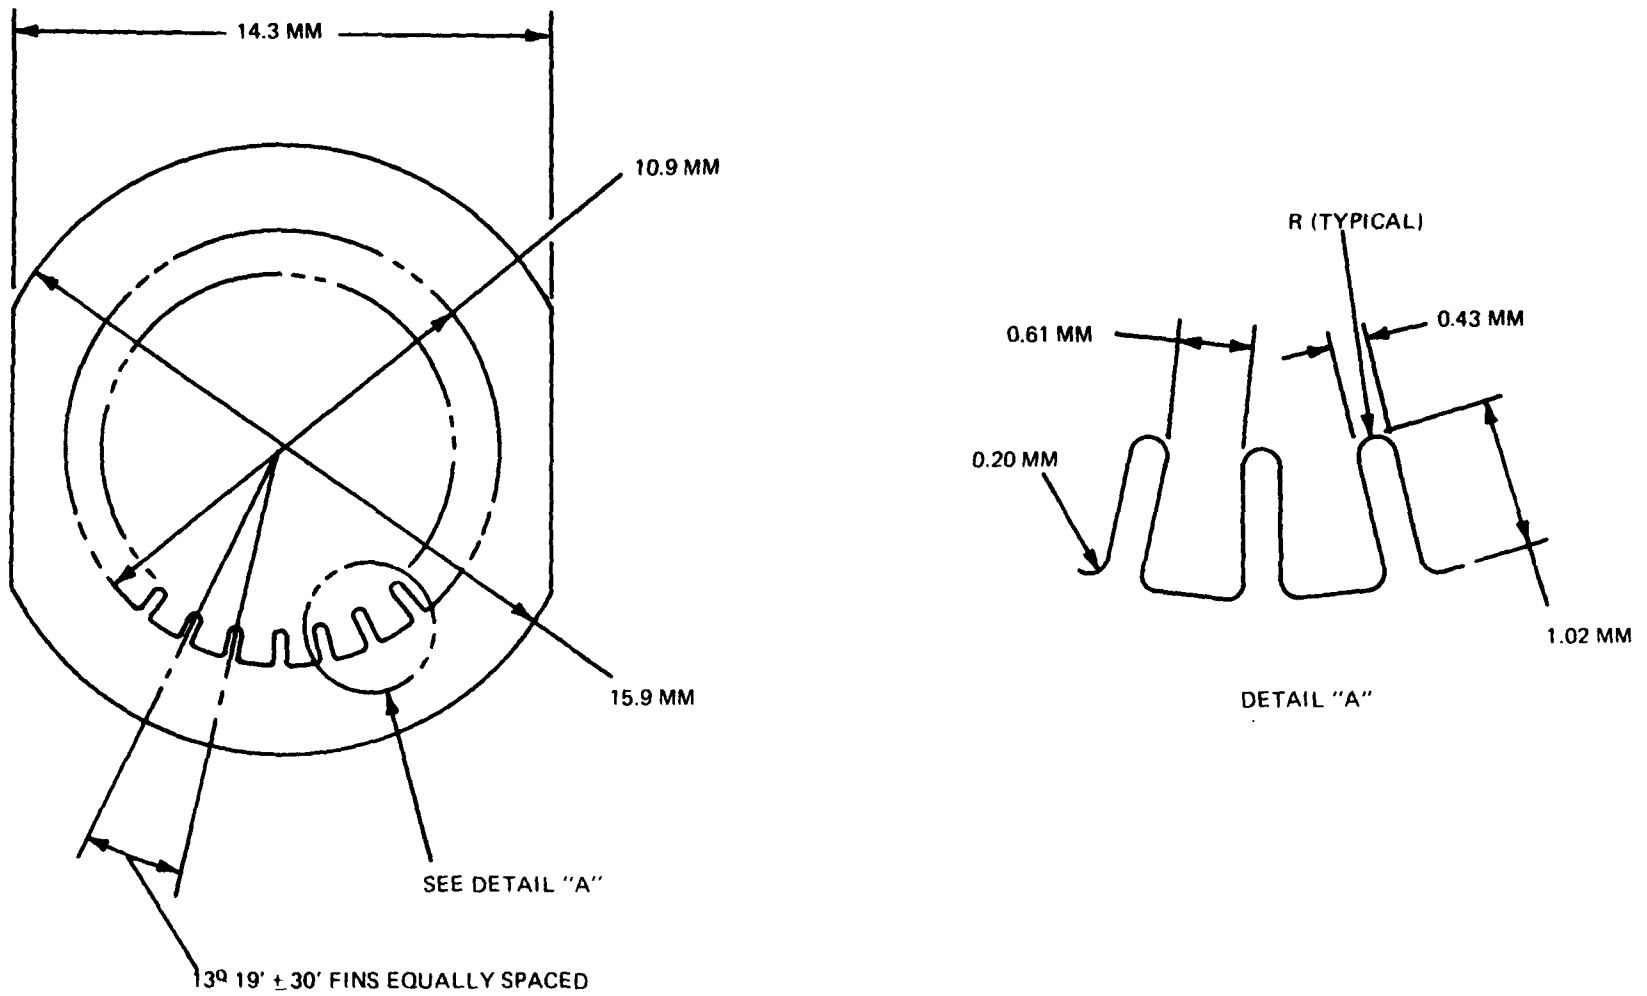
Cross Section of Extruded Grooved Tubing
